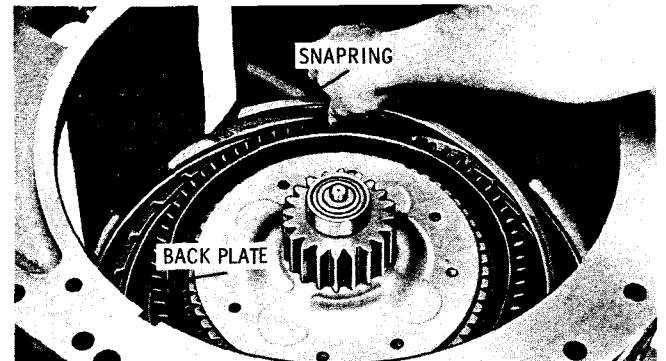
Installing high-range clutch back plate snapping S1658
